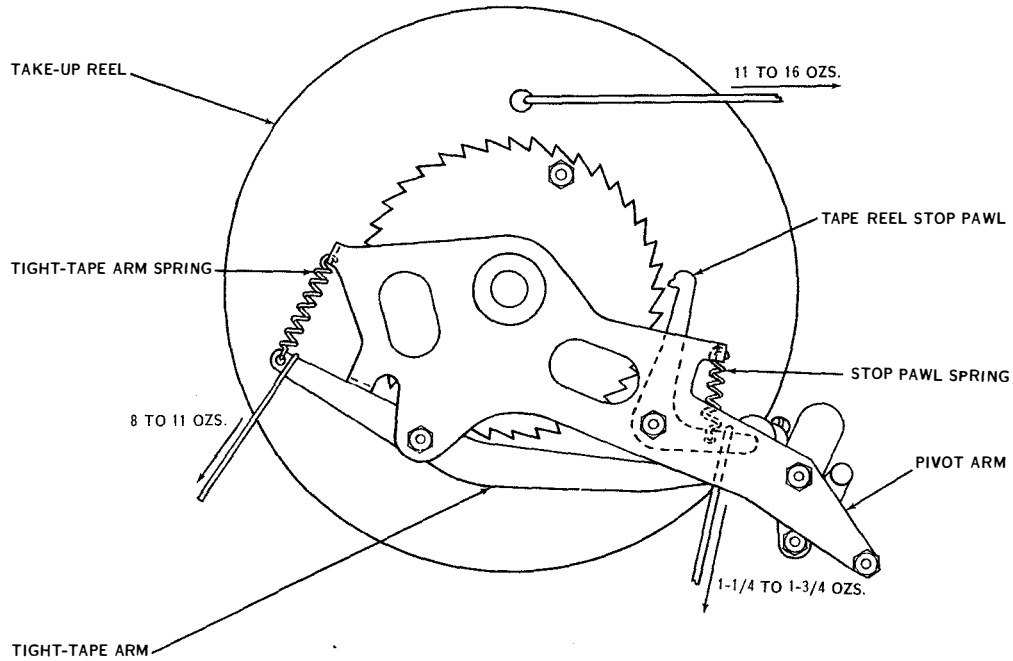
Tight Tape Arm and Stop Pawl Spring Tensions
